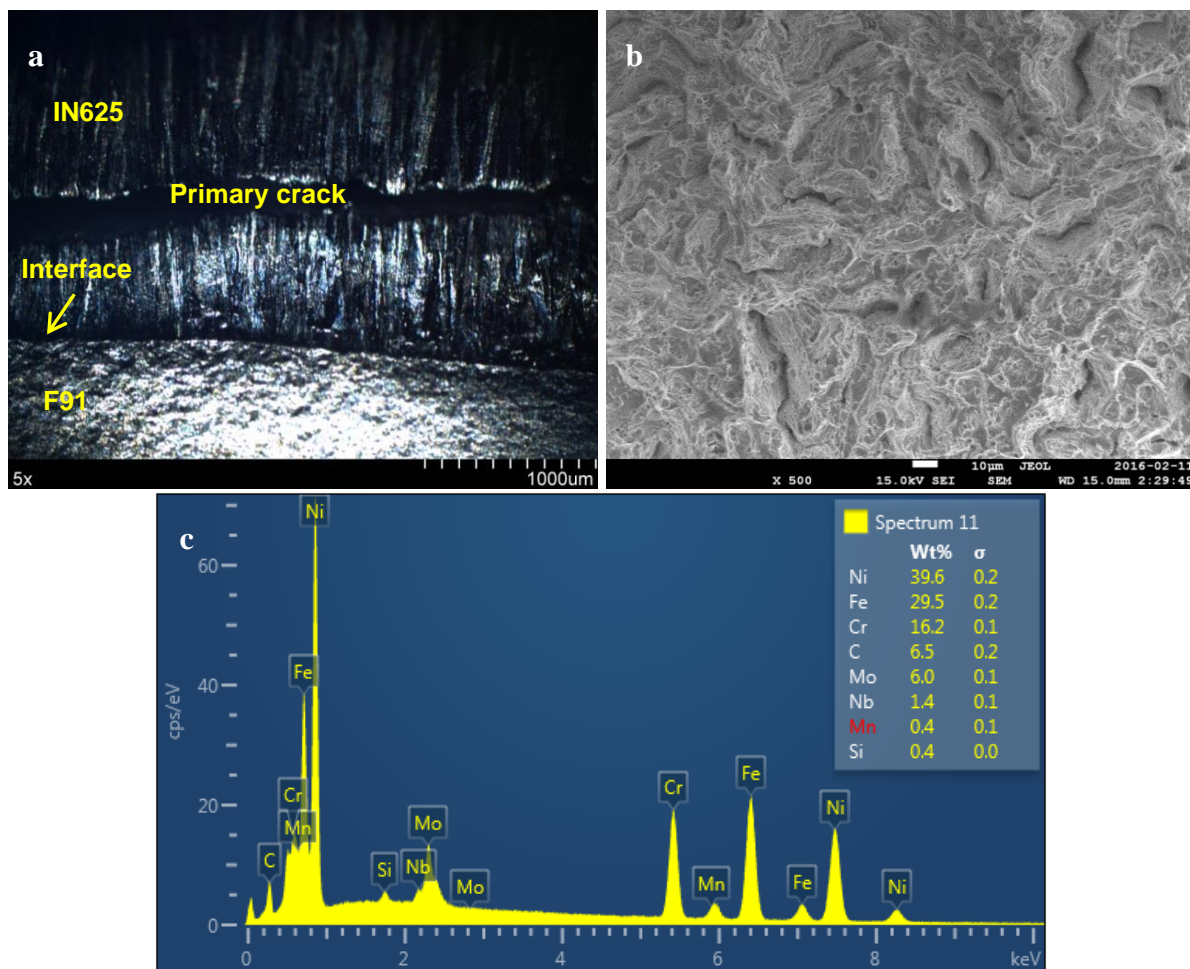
A fractured IN625 specimen in the as-tempered condition: (a) cross-section, (b) fractograph and (c) EDS spot measurement on the fracture surface.
